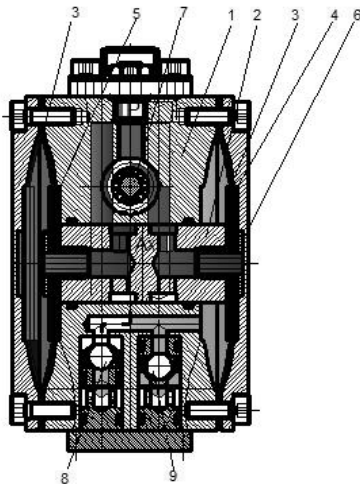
E-E section through the injection device 1-body; 2-piston; 3-membranes; 4-outer flanges; 5-inner flanges; 6-screws fastening the membranes; 7-hydraulic directional valve, spool fitted; 8-primary solution intake valve; 9-primary solution discharge valve
